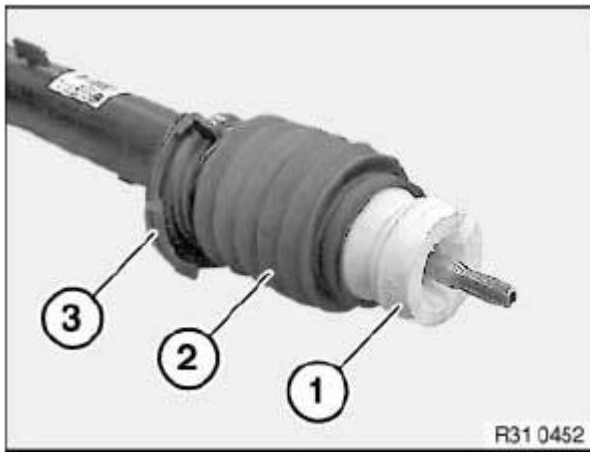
Identifying Auxiliary Spring, Gaiter And Lower Spring Pad
